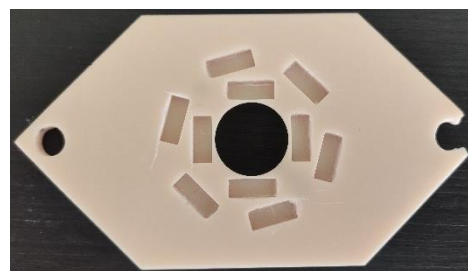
Backplate prototype III: Top, with adjusted positions for inner magnet ring.
